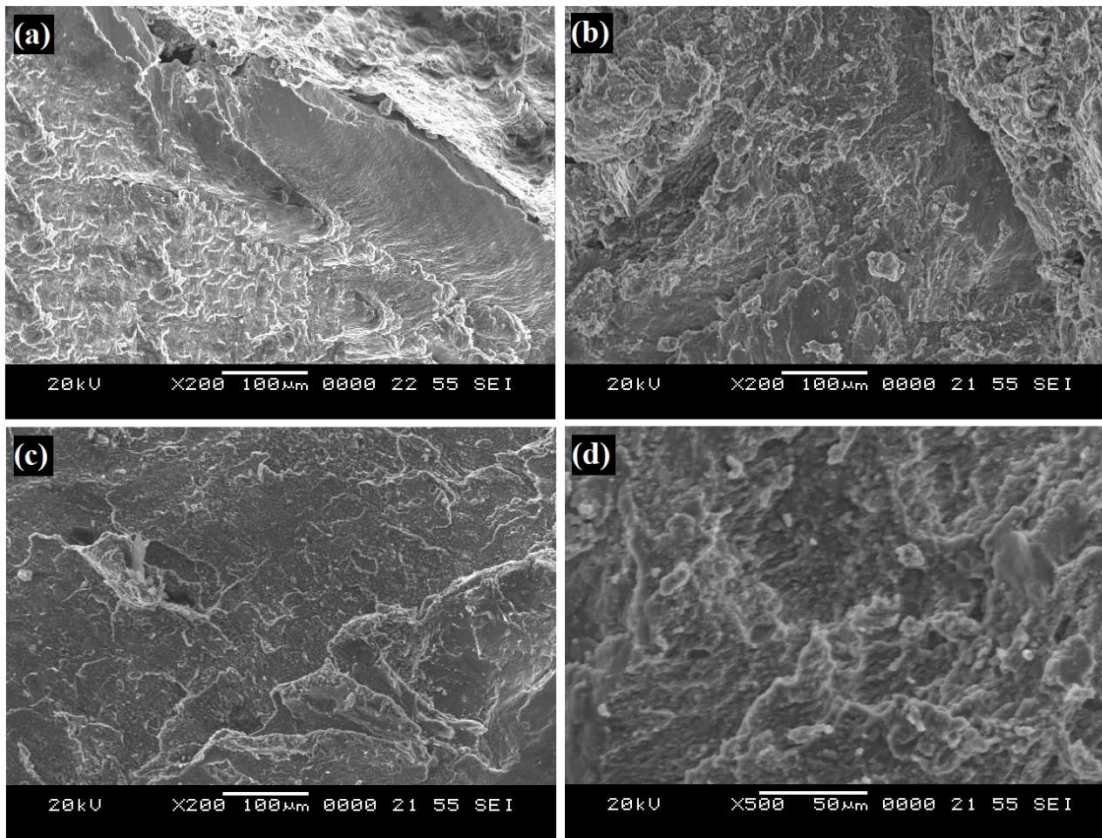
SEM images of tensile fracture surface (tested in the direction of weld) of Al-5Mg-8Ce-3.5Si aluminium alloy joints friction stir welded with SPP tool, at (a) Speed of tool rotation of 1000 RPM and welding speed of 10 mm/min, (b) Speed of tool rotation of 1000 RPM and welding speed of 15 mm/min, (c) Speed of tool rotation of 1000 RPM and welding speed of 20 mm/min, (d) Higher magnification image showing the dimples, pullout, decohesion and cracked AlSiMg particles.
